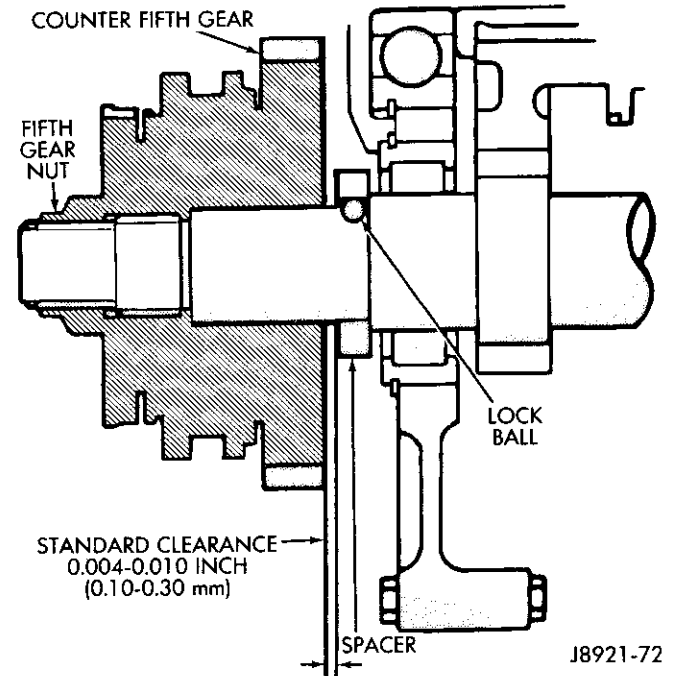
Checking Fifth Gear Thrust Clearance — AX5
